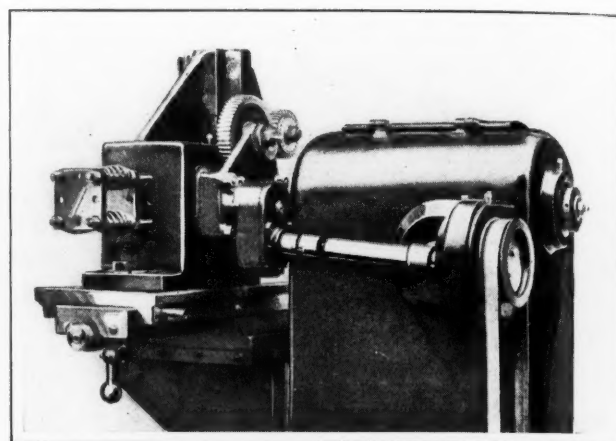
Close-up View of Drive to Work Rotating and Oscillating Mechanisms
